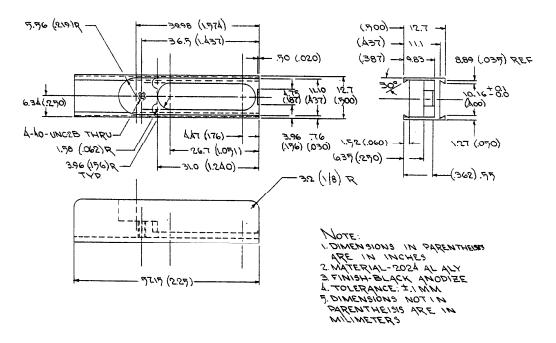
Details of the aluminum alloy filter holder body. Dimensions in parentheses are in inches. Dimensions not in parentheses are in mm. (Tolerance  $\pm 0.2$  mm.)
